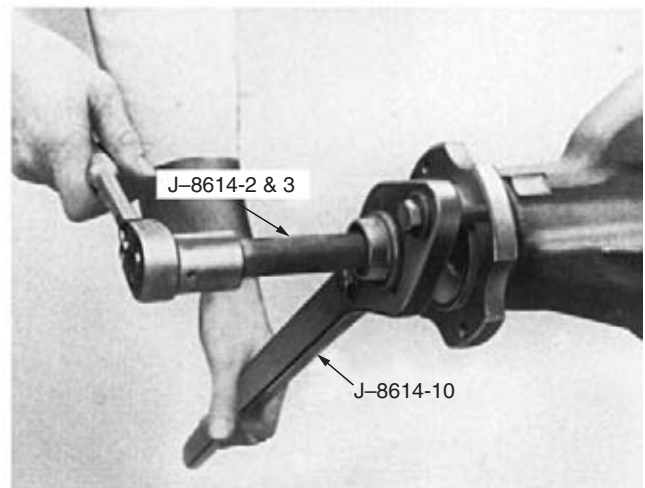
When attached to the pinion flange, this tool will provide the leverage needed to hold the pinion flange as the drive pinion nut is loosened and tightened. It can also be used as a puller when removing the flange (inset). (Courtesy of Kent-Moore)
